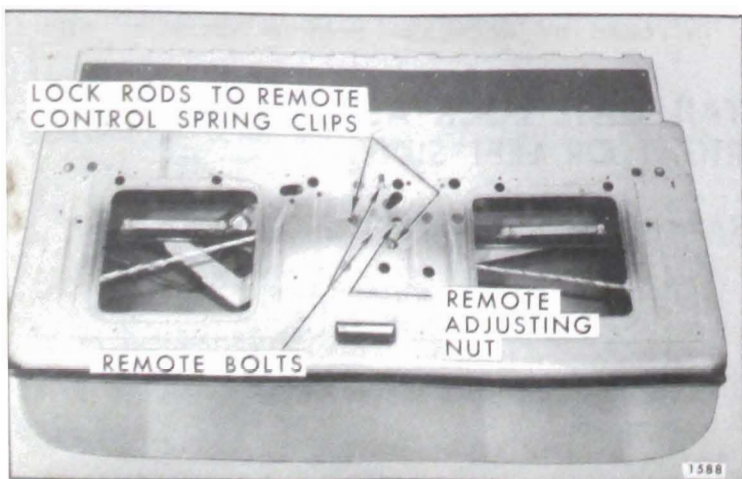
Tail Gate Hardware - "A & B" Body Styles
